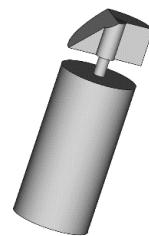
3D CAD design of vibration motor in a cylindrical case.
